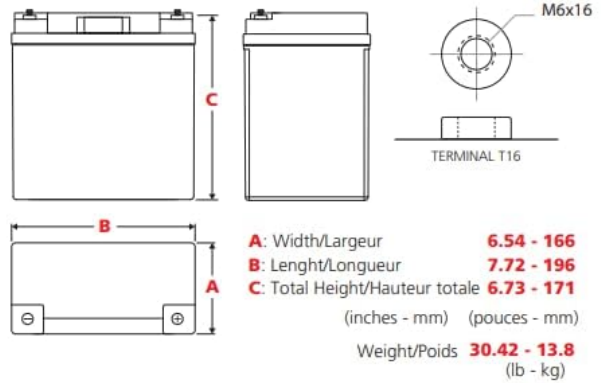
Specification sheet for the WPHR12-48, detailing dimensions and terminal type (M6x16, Terminal T16).
